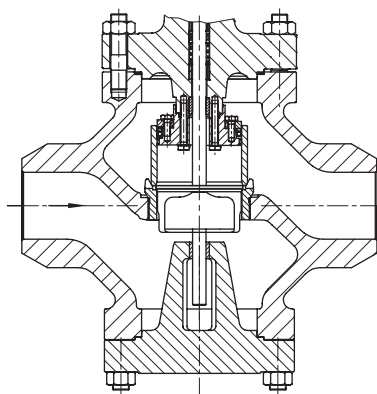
Type 3254 Valve with welding ends and balanced plug
